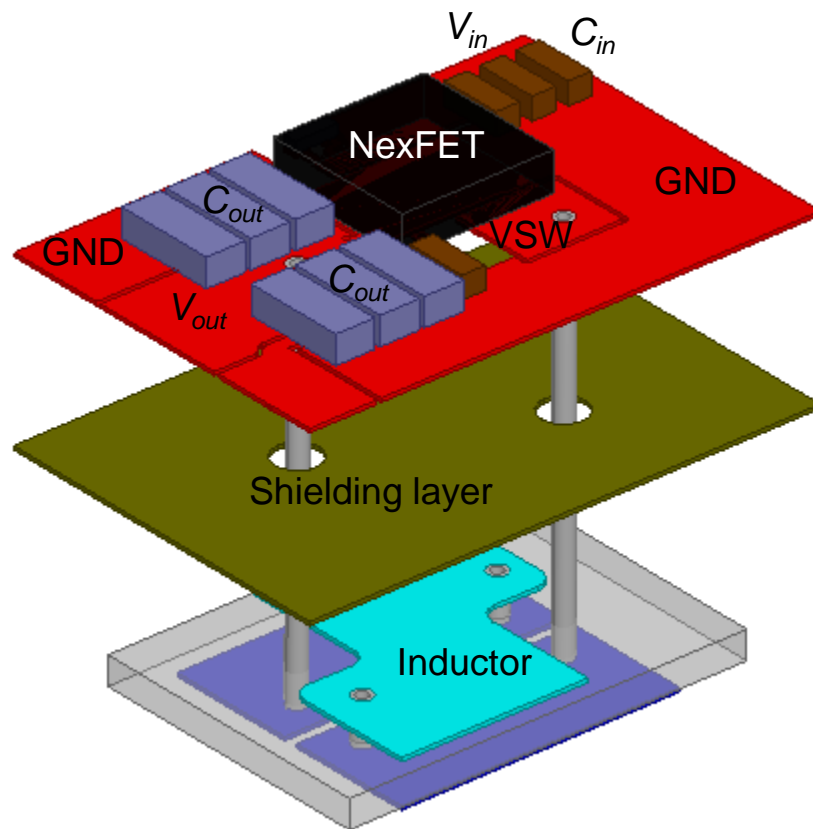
The expanded view of the 4-layer PCB structure for the 3D integrated POL module with embedded core.
